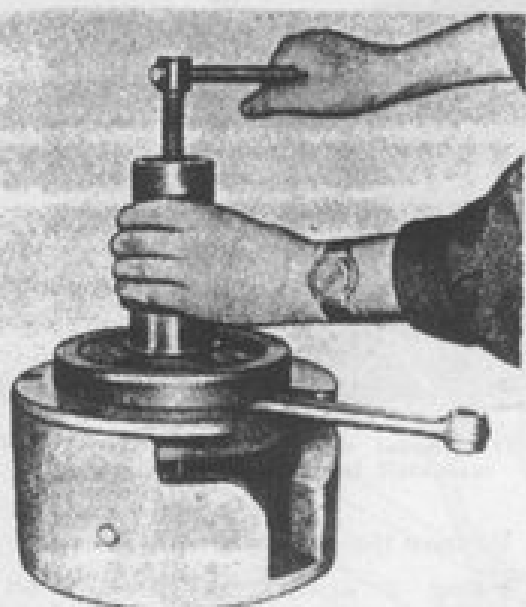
Removal of bearing from crankshaft half axle, ИЖ-П-3 motorcycle.
